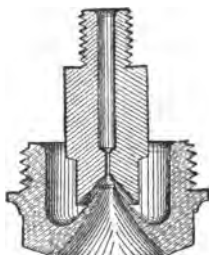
Spraying Nozz'e, Priestman Oil Engine.
